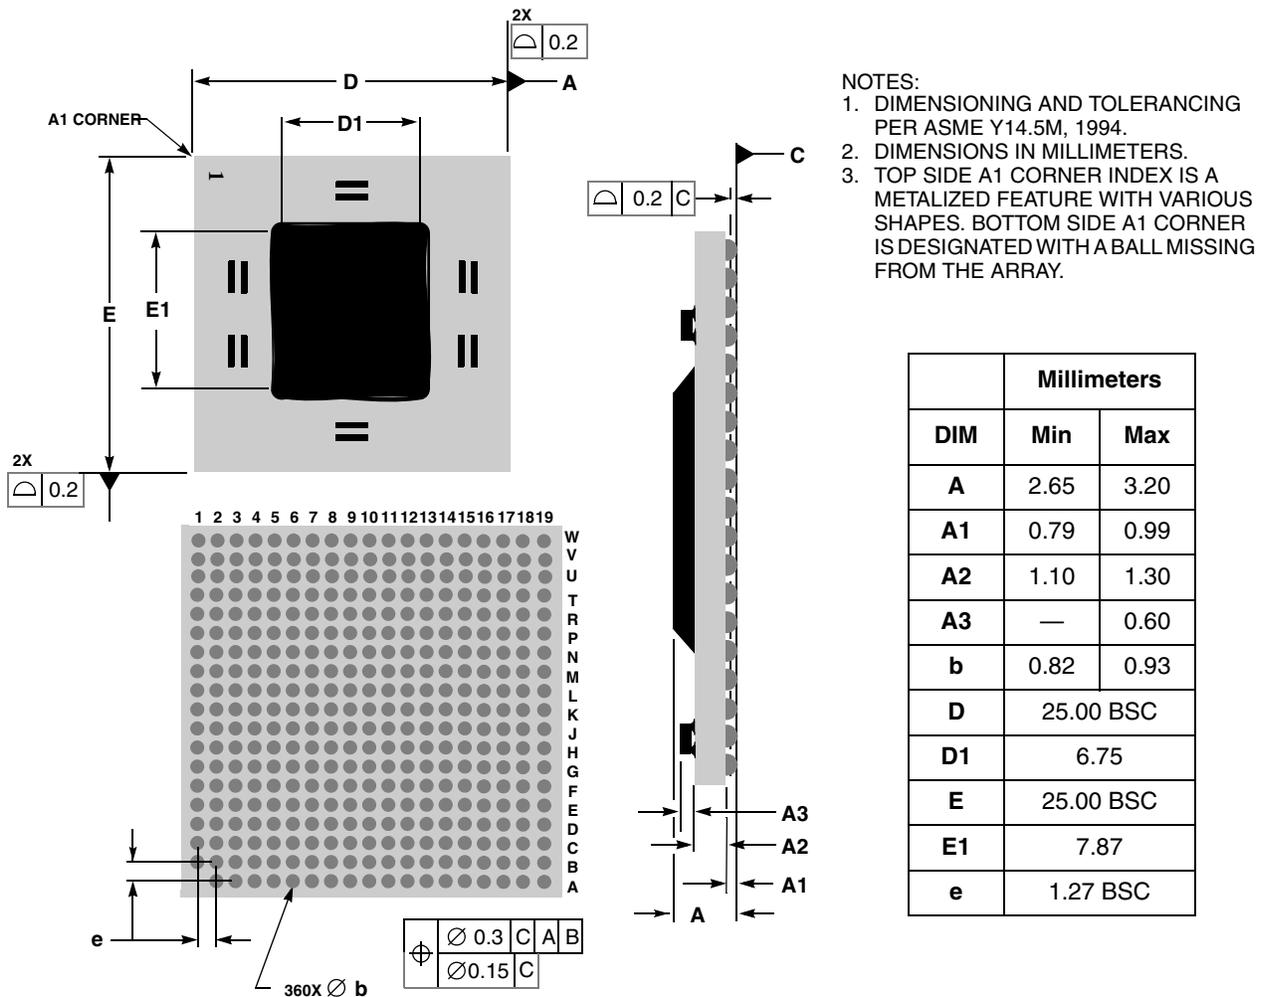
Mechanical Dimensions and Bottom Surface Nomenclature for the MPC755, 360 CBGA Package
